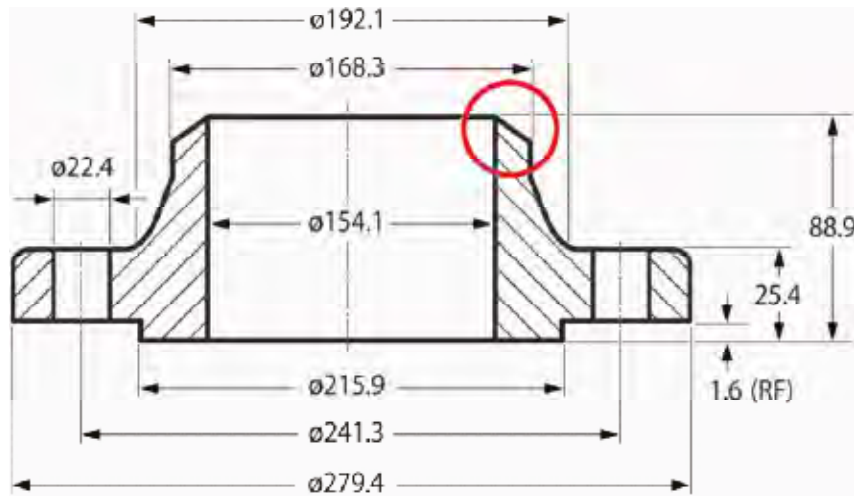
Weld neck flange NPS 6, class 150, schedule 40, ASME B16.5
